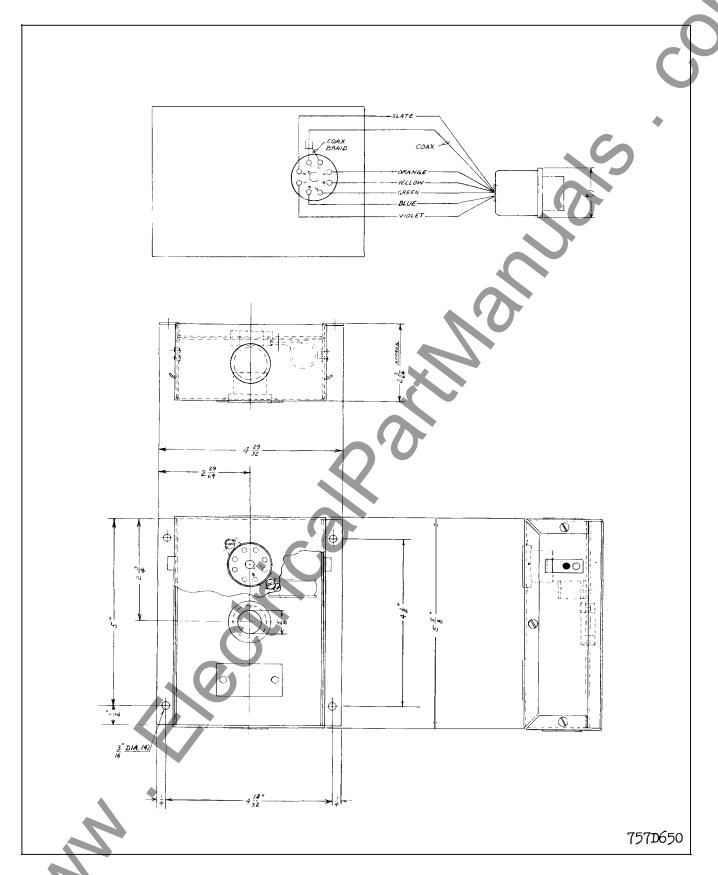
Voice Adapter Mounting Assembly with 6 ft. Cable, \$\\$757D650G03.
